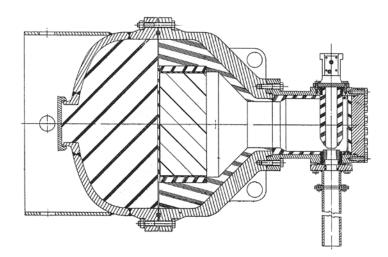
Cross-sectional view of TX-338 Throttleable Solid Rocket.
